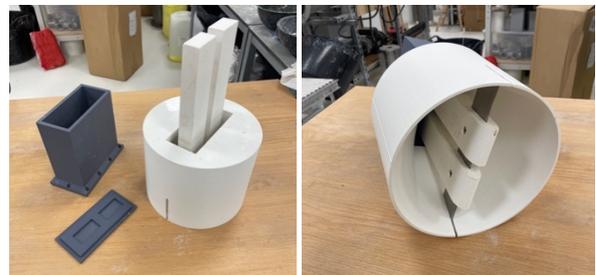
3D printed extrusion dies with cores fitted to create earth bricks with cavities. Photo: T. Jorgensen, 2023.
